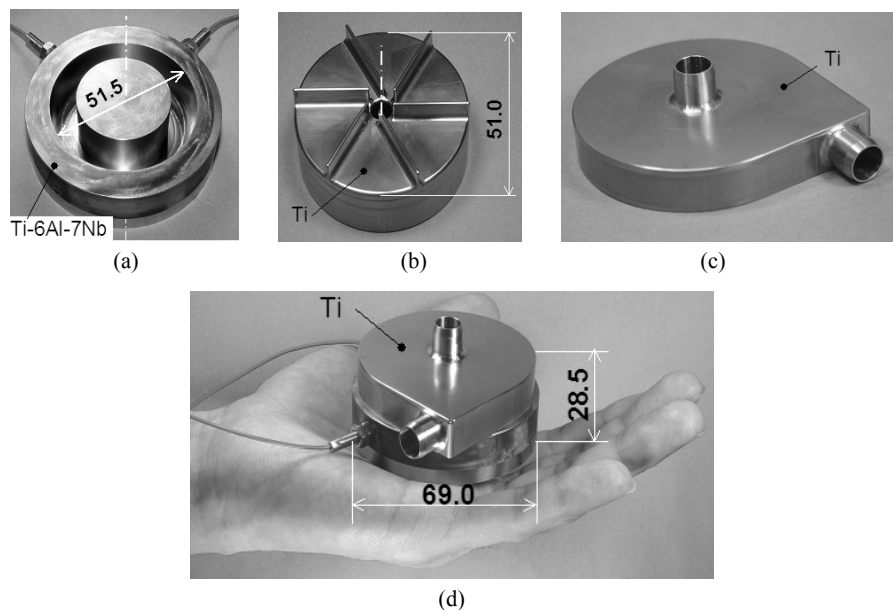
Photographs of (a) the stator, (b) the impeller, (c) the top housing and (d) a MedTech Heart with a titanium housing
